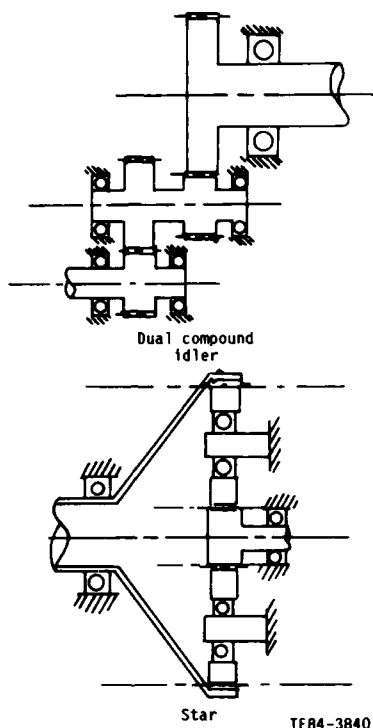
Offset and In-Line Candidate Gearbox Arrangements.
